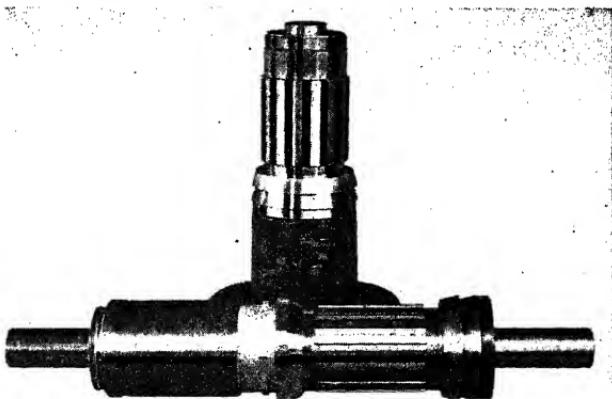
S.A.E. 50 splined bushing and mandrel assembly.
